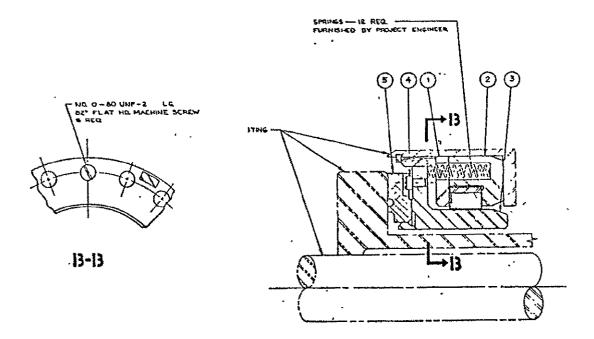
NASA-Designed Oxygen Face Seal With Composite Piston Ring
